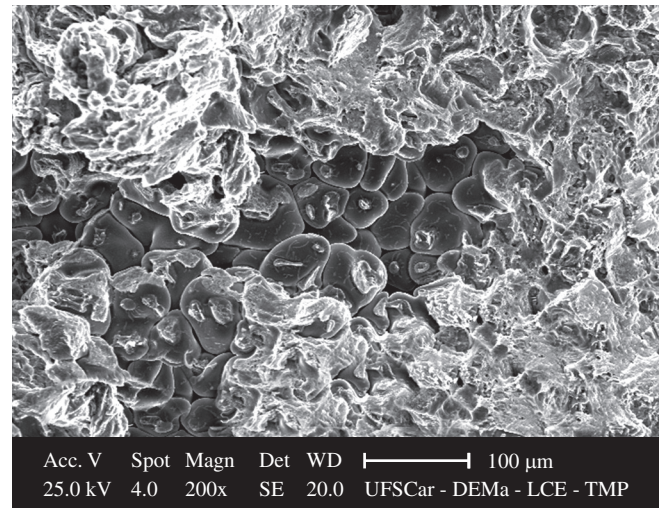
Scanning electron microscope fractography of the 0X (non deformed) tensile specimen fracture surface showing a large shrinkage void.
